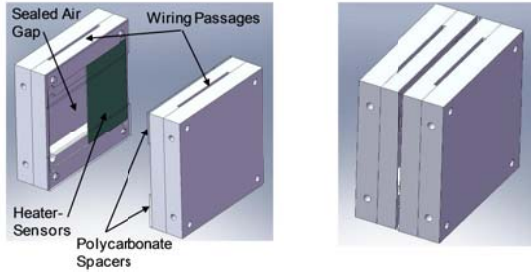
CAD drawings of the exploded and assembled views of the heat transfer channel.
